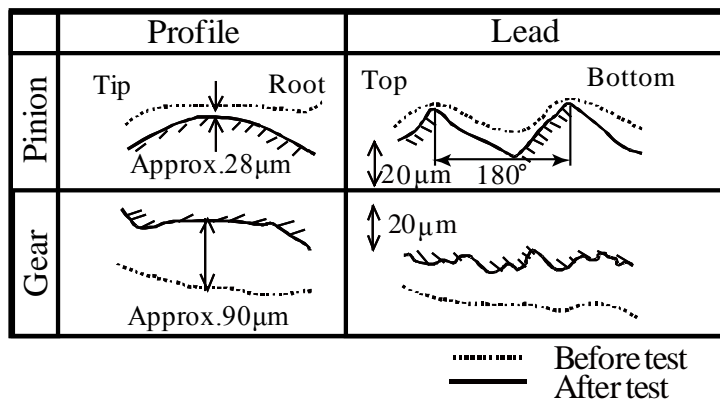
・17 Profile and lead errors before and after endurance testing using form rolled pinion
